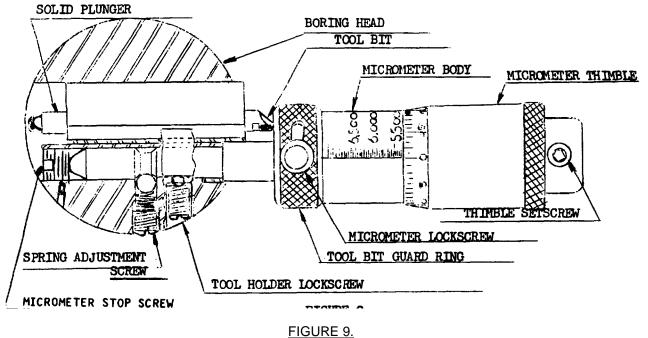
shows the tool holder in the boring head ready to be locked in position. The small spring plunger is partly compressed, thus pushing the tool holder and tool bit out against the face of the micrometer body with a light spring pressure.
